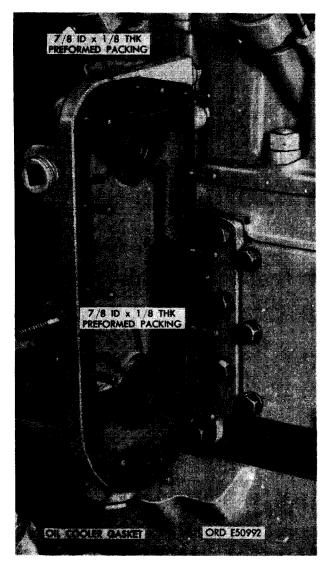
REMOVING OR INSTALLING PREFORMED PACKINGS AND OIL COOLER GASKET.
